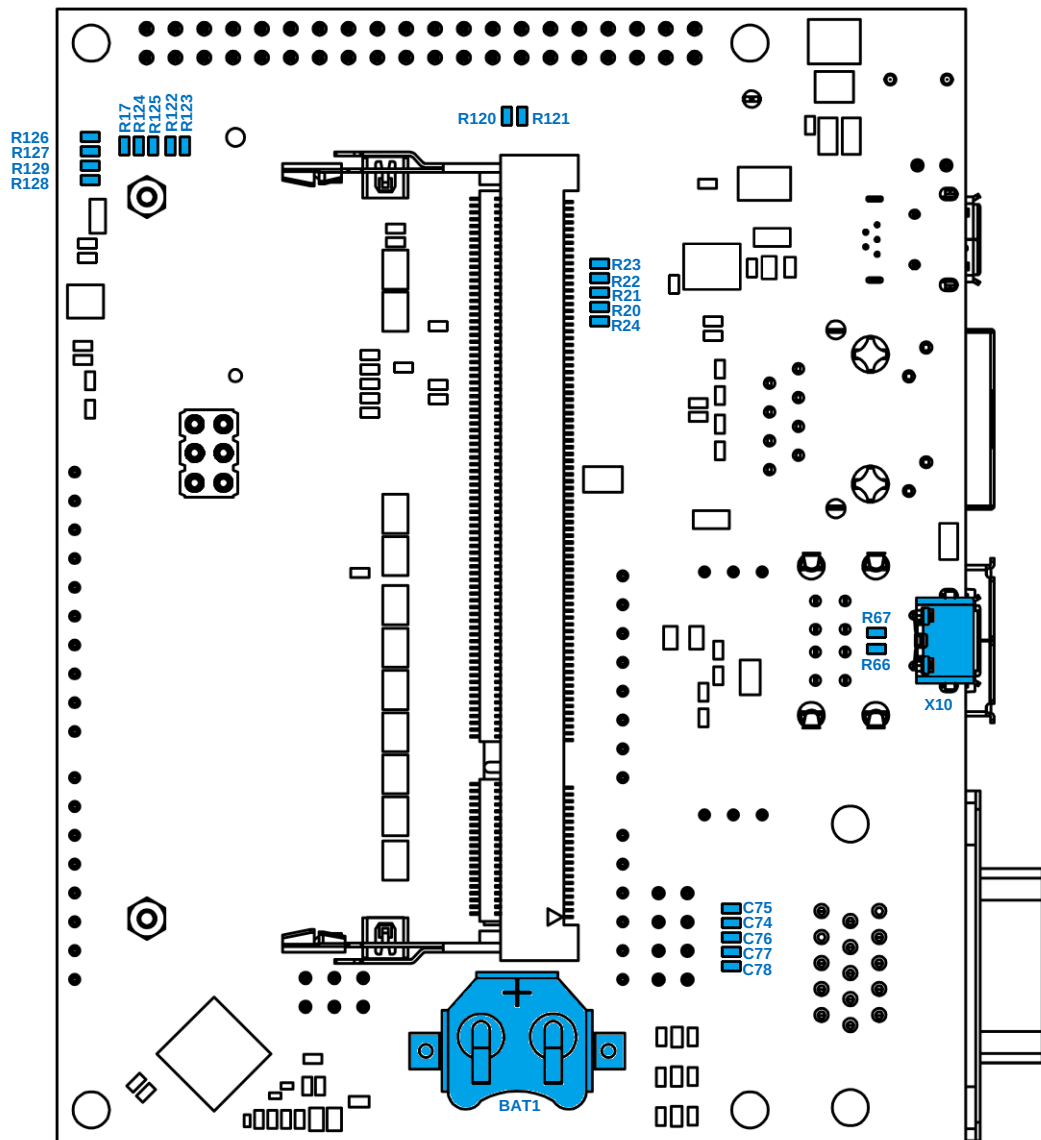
Aster Carrier Board Assembly Options – Bottom Side
